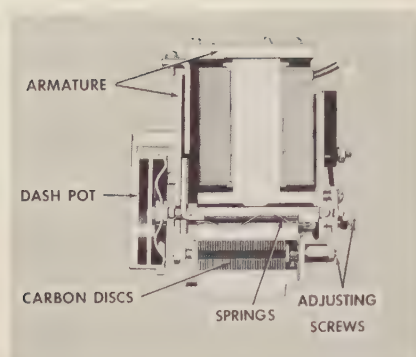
This cross section of the fundamental regulating unit shows the double-loop type multiple spring developed by Delco-Remy engineers.
